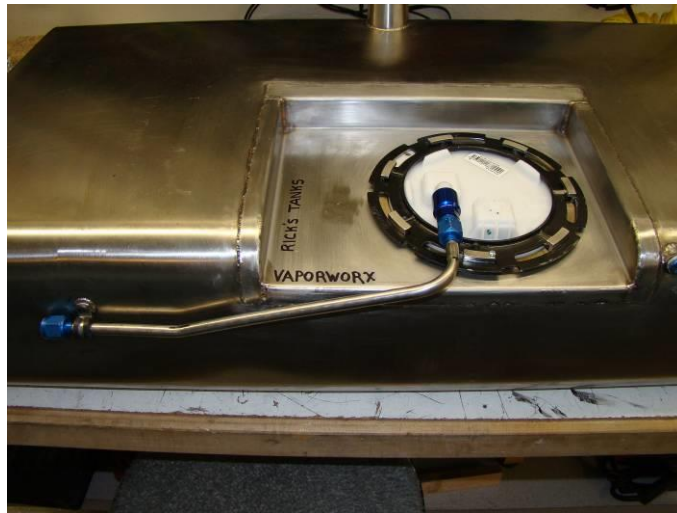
The recessed fuel tray, fuel module mounting ring, and the #10-32 bung have been fully welded. Note how the cushion clamp is just inboard of where the female AN6 connection is located. This fuel line assembly should stay mounted on the tank during installation and removal of the tank. A Russell P/N 640850 will convert the fuel module output to a male AN6 output.
